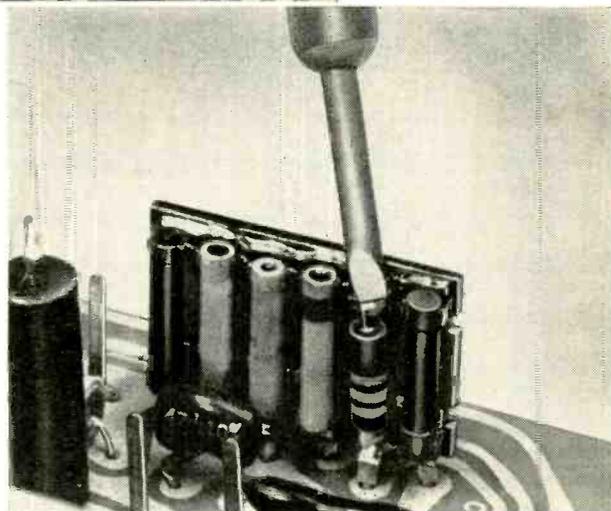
c—Repair is completed by soldering standard component in pack to replace defective section.
